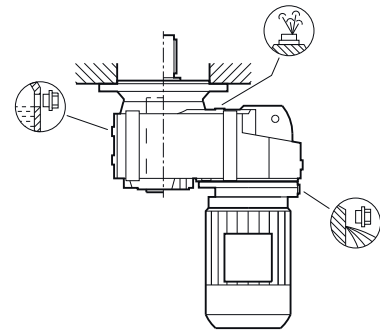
Mounting positions for parallel shaft gearbox F.F flange-mounted design and F.Z with housing flange, size 29
